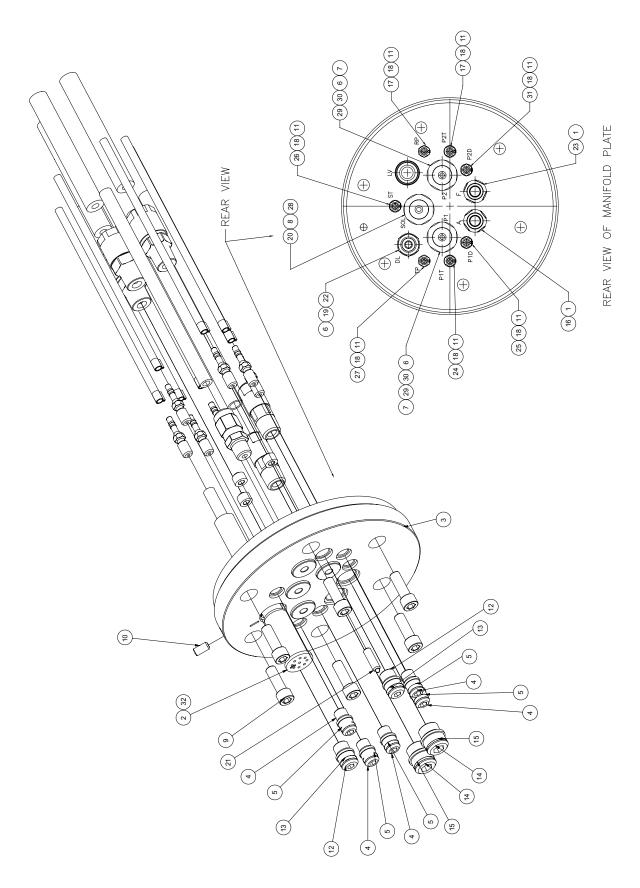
79156 Rear Tubing Manifold Assembly - English
